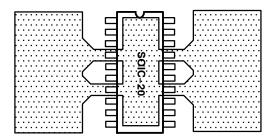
Example of SOIC-20 PCB Ground Plane Layout (preferred layout at top and bottom)
